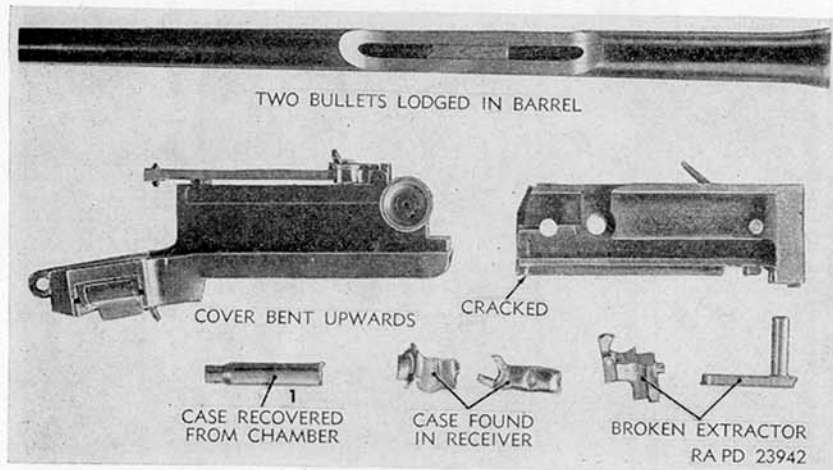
Damage from firing with bullet in bore, cal. .30 machine gun.
